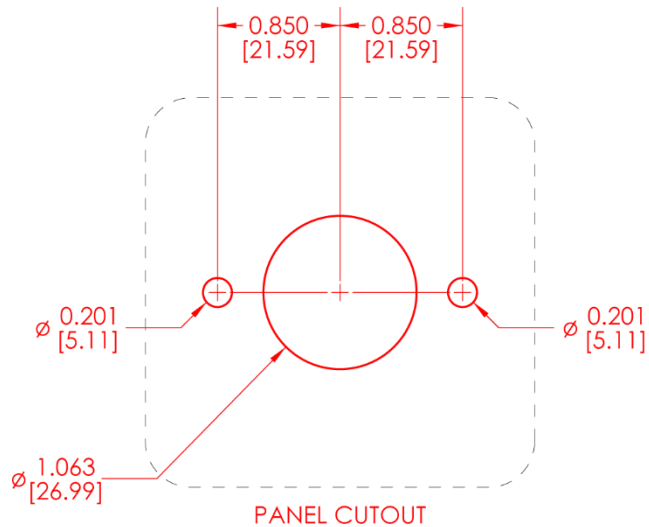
SmartTOUCH, 4 position installation dimensions in inches [millimeters].
